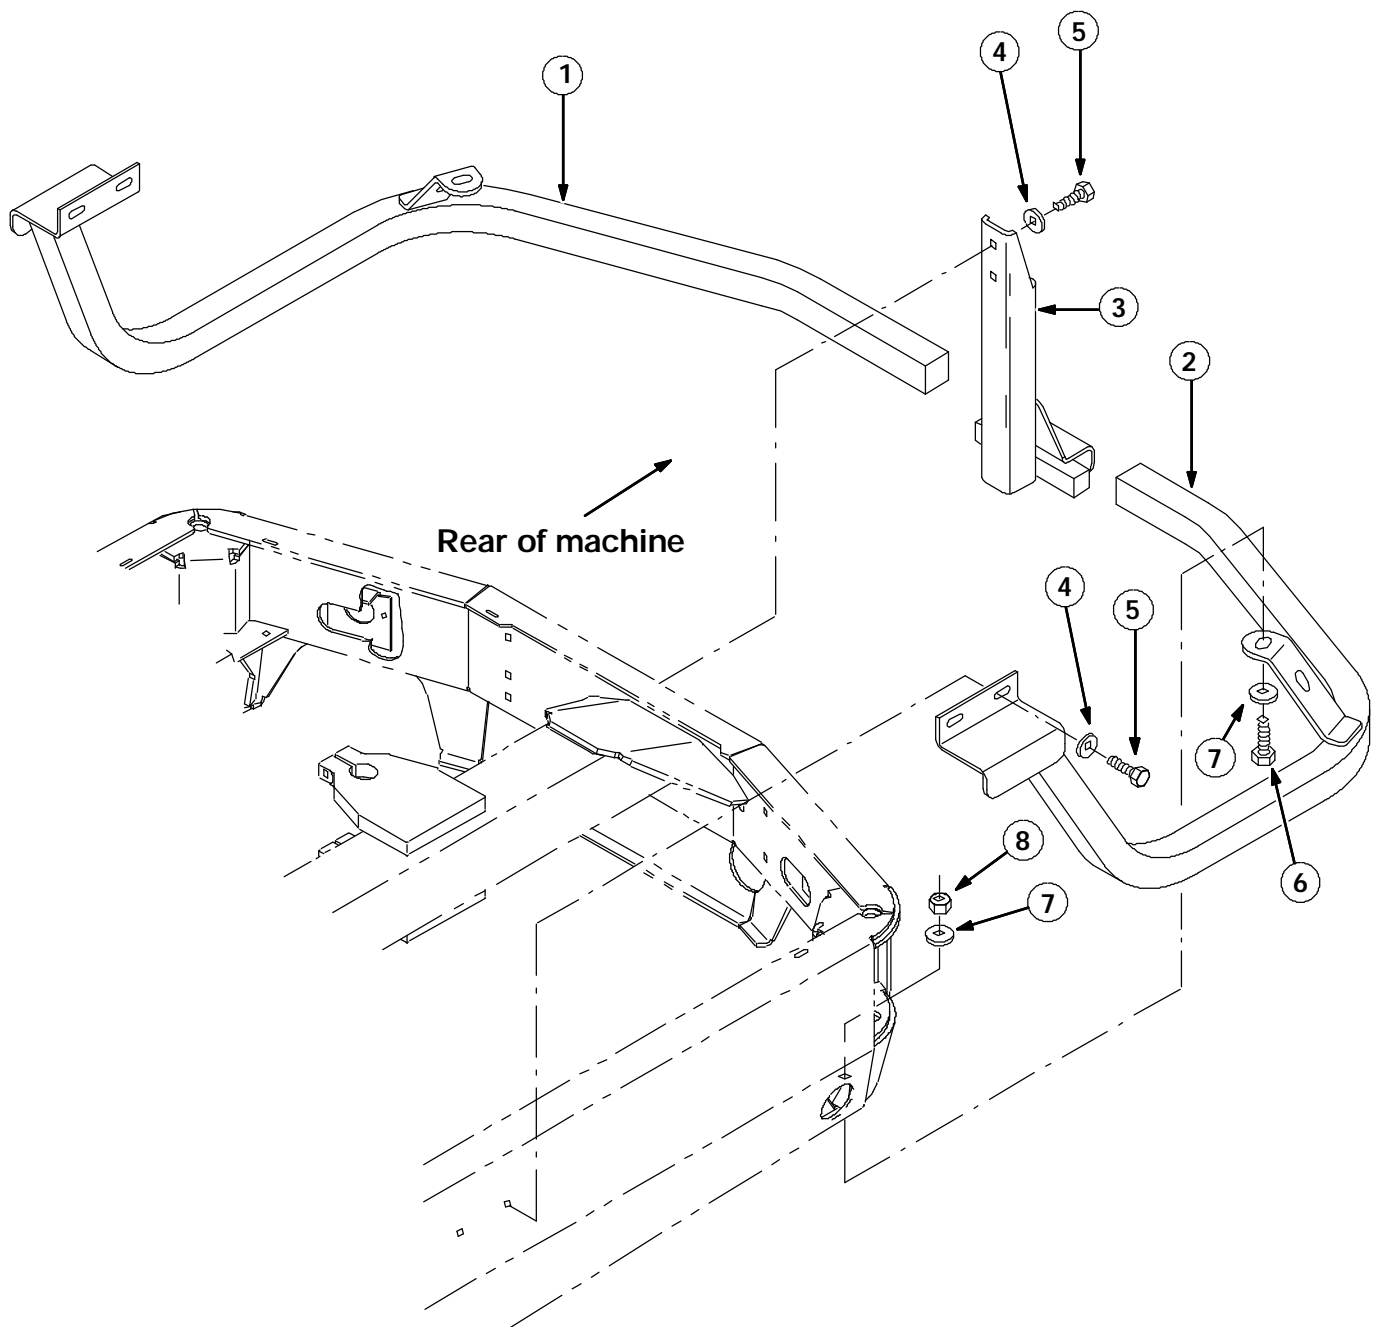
SQUEEGEE GUARD KIT INSTALLATION
